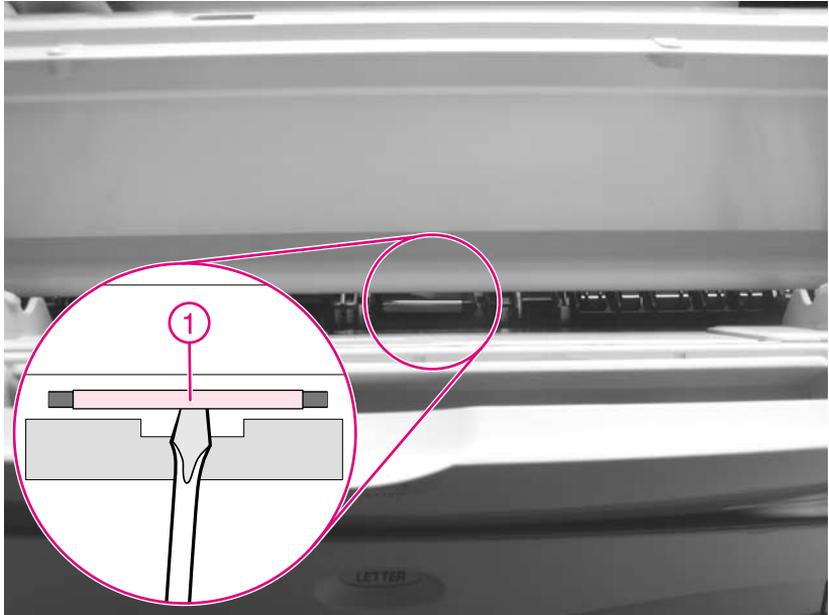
Detaching the Tray 1 separation pad (front of the printer)
